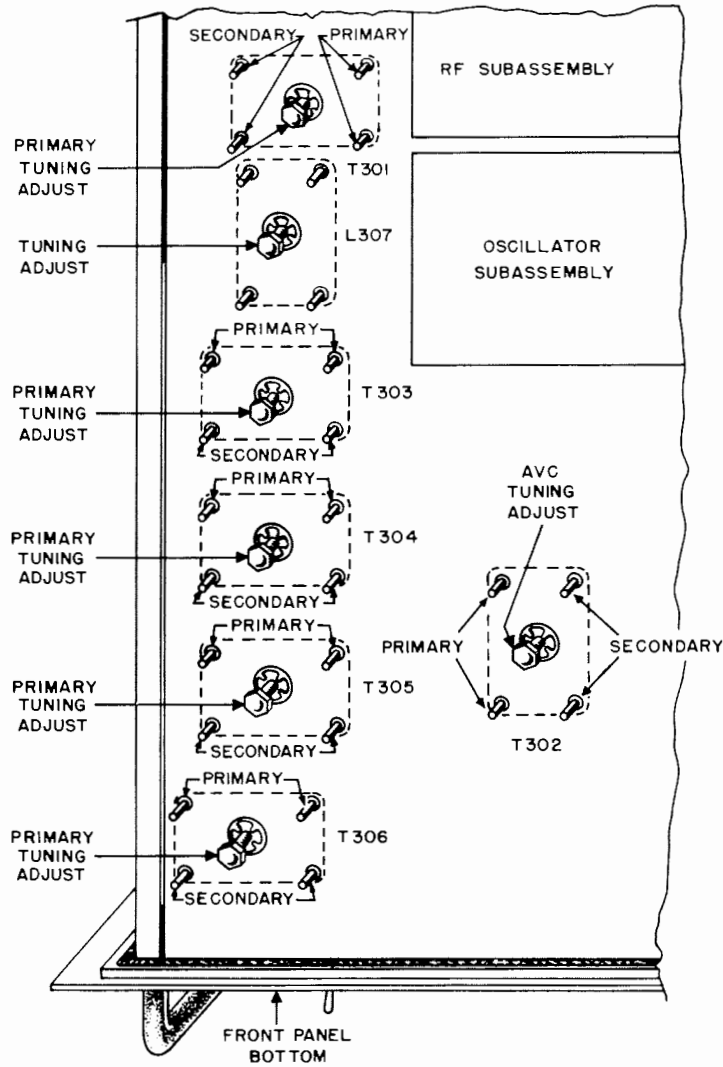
Radio Receiver R-361/GR, Bottom View, Dust Cover Removed
